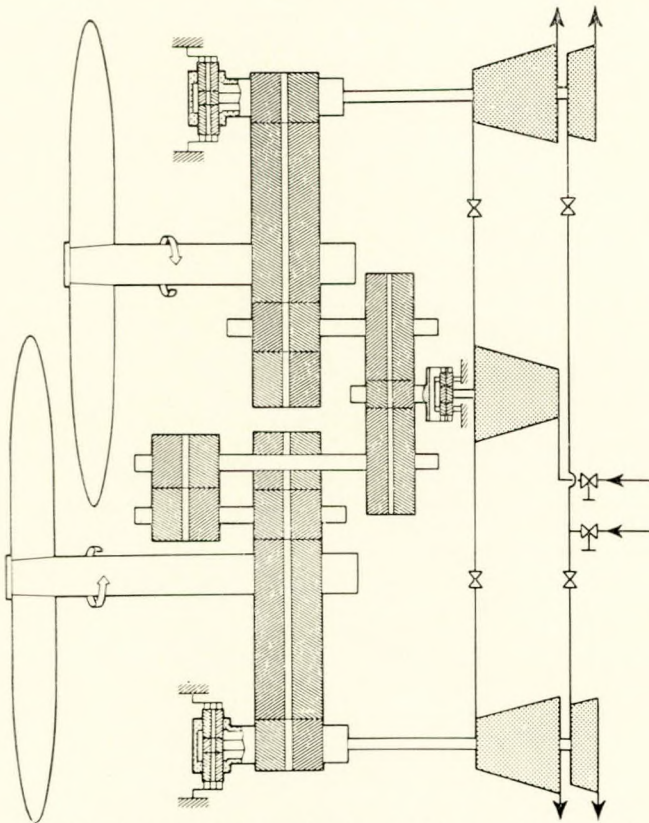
Principle of gearing for turbine machinery with overlapping propellers
